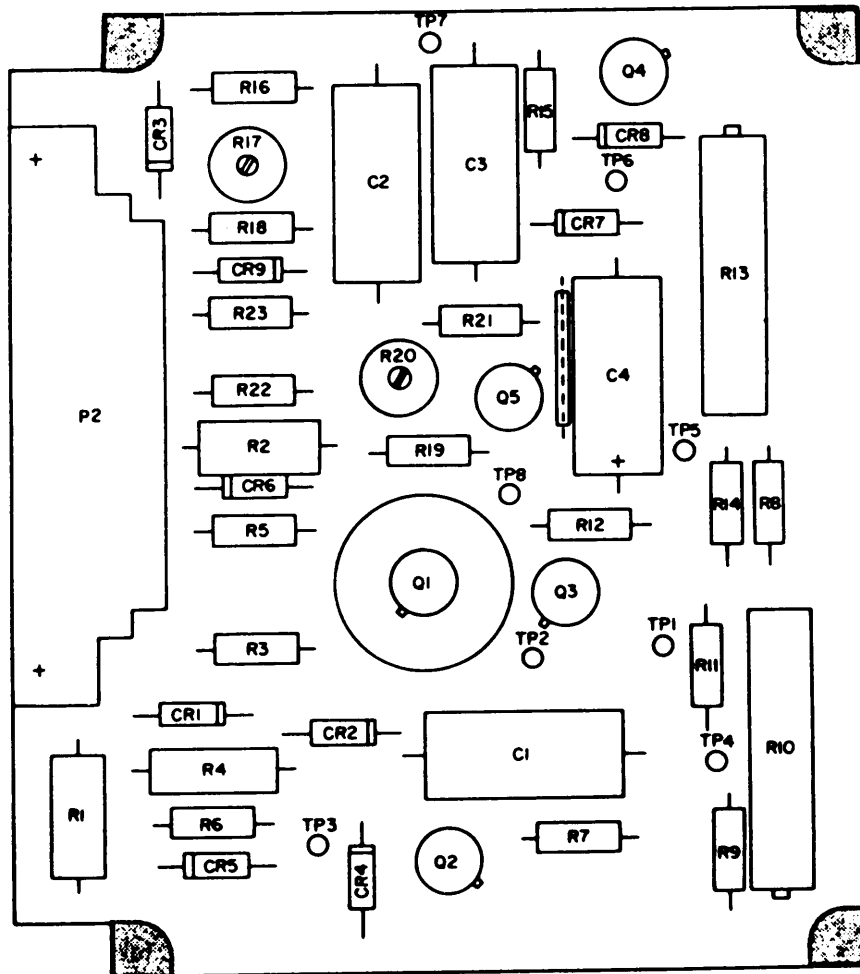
Power Supply Subassembly 5TR1PS1A1, Parts Location.
